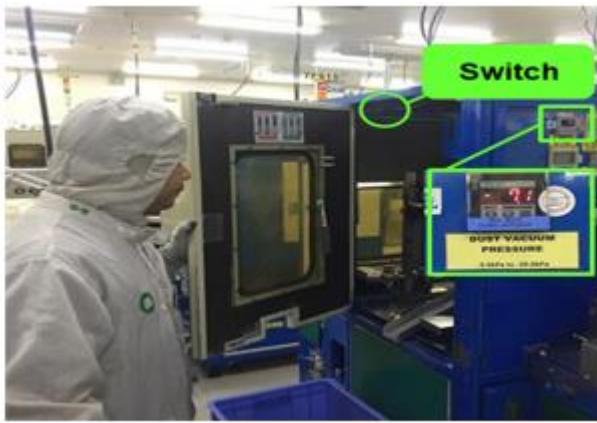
Modified machine mechanism and how to perform its new function and use.
